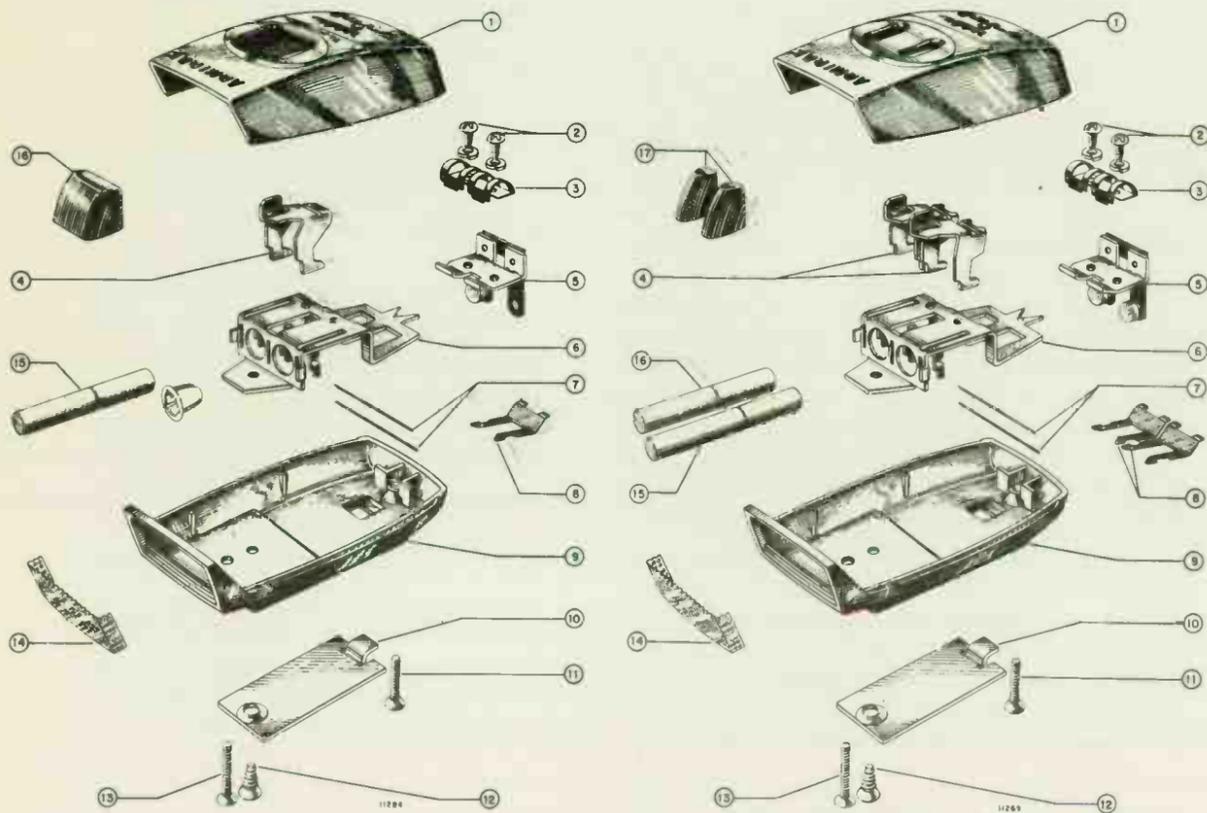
Exploded View of Son-R Tuner S11A. See Parts List for part numbers and descriptions.
